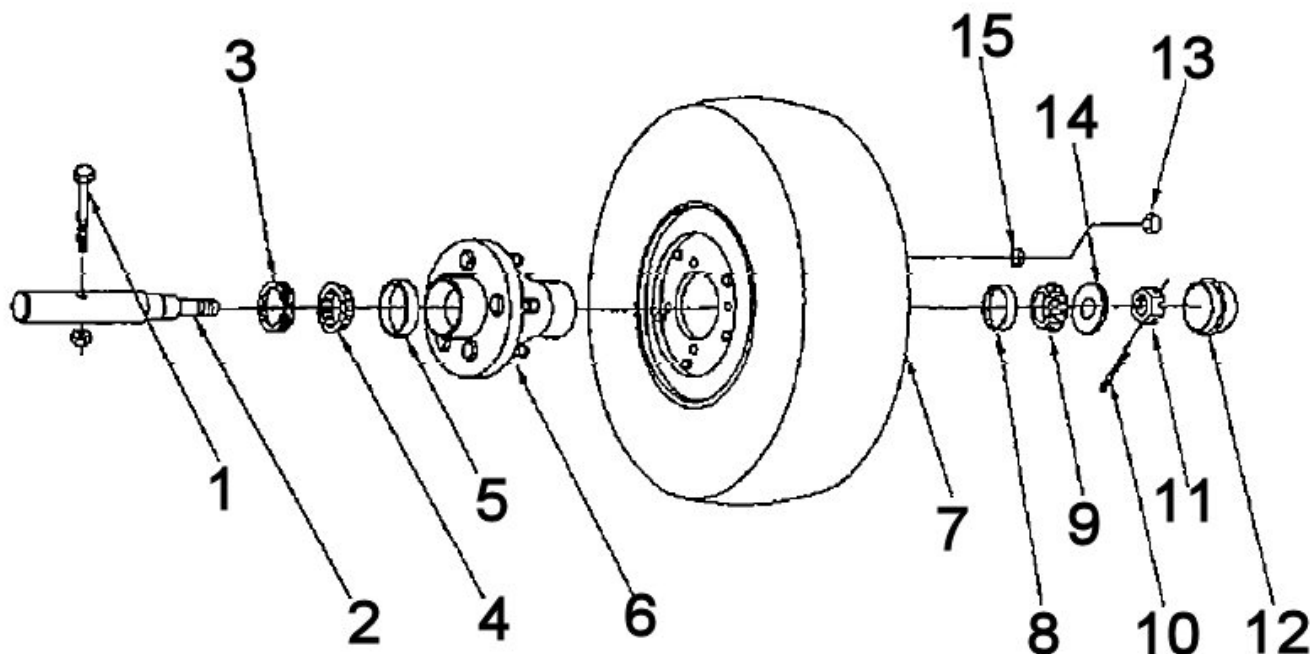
AIRPLANE WHEEL COMPONENTS
